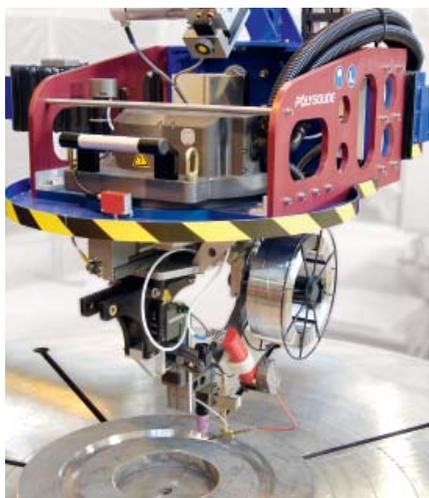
Example of equipment designed for cladding oblong shapes for valve bodies used in the oil industry. The welding head is held and positioned by two slides at the end of the boom. The trajectory is obtained by composing movements from the 180° torch rotations on the head and travel on the slide. With the collector installed on the orbital head, continuous welding is possible due to the absence of bundles.
